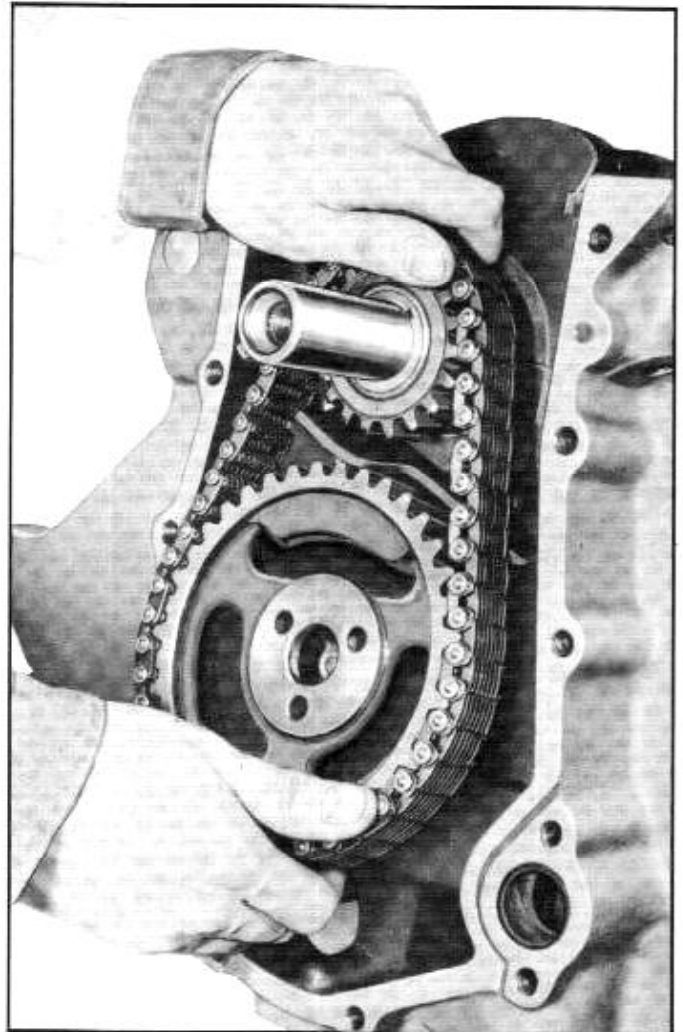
C-149—Installing Camshaft Sprocket and Timing Chain
